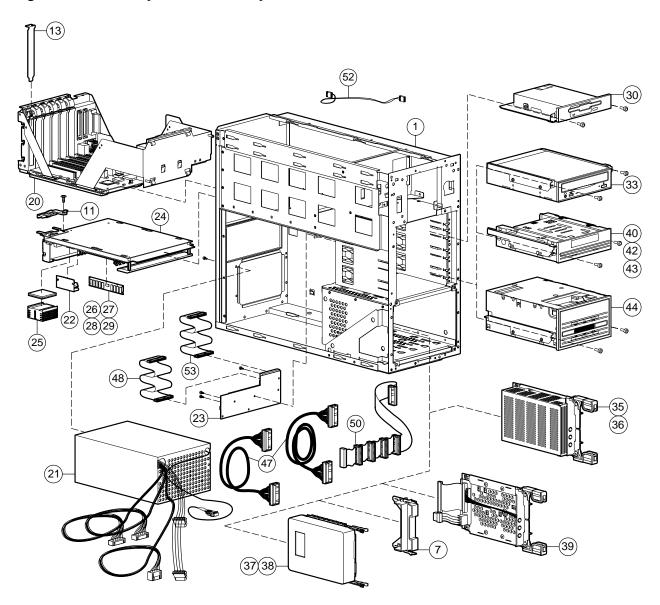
Exploded View of the Compaq ProLiant 2500 and 2500R Server System Components
